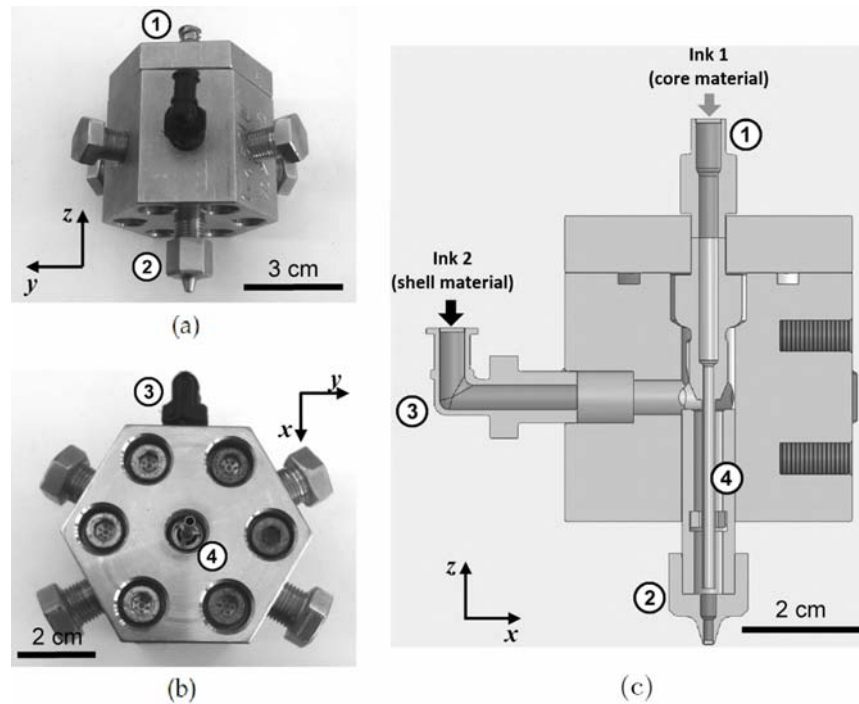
Setup of the adapter for co-extrusion [75]. Side (a) and bottom (b) view. Cutaway view from 3D model (c). Different components are enumerated in the figure: ① core ink feeding channel, ② extrusion nozzle, ③ shell ink feeding channel and ④ final part of the core feeding channel.
